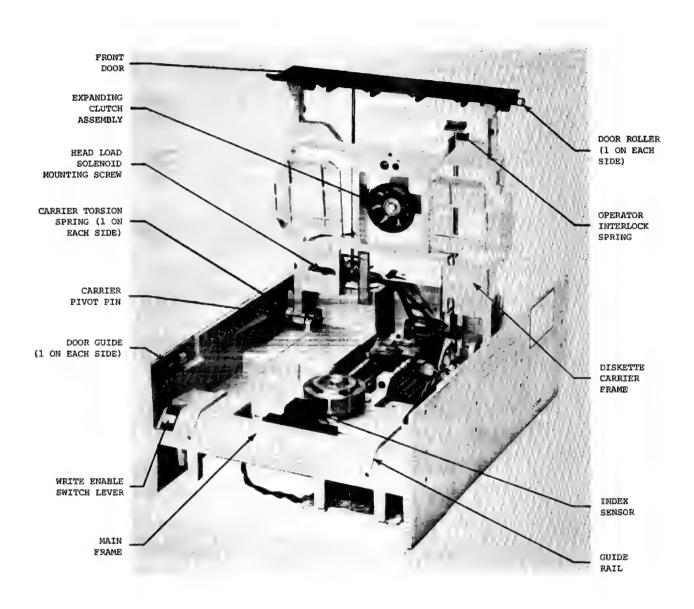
Front View of Model 76 Diskette Drive with Carrier Open
